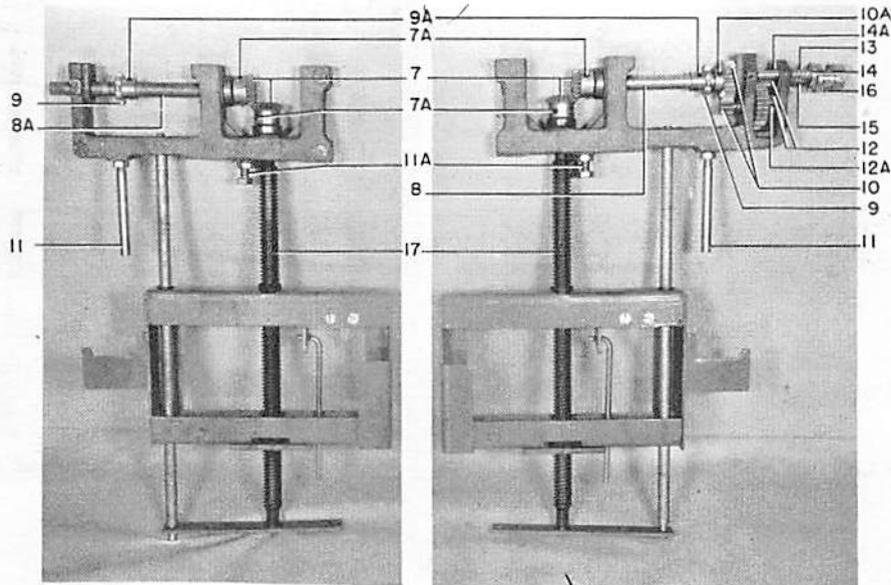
A View Showing Elevating Mechanism Motor and Control Unit
